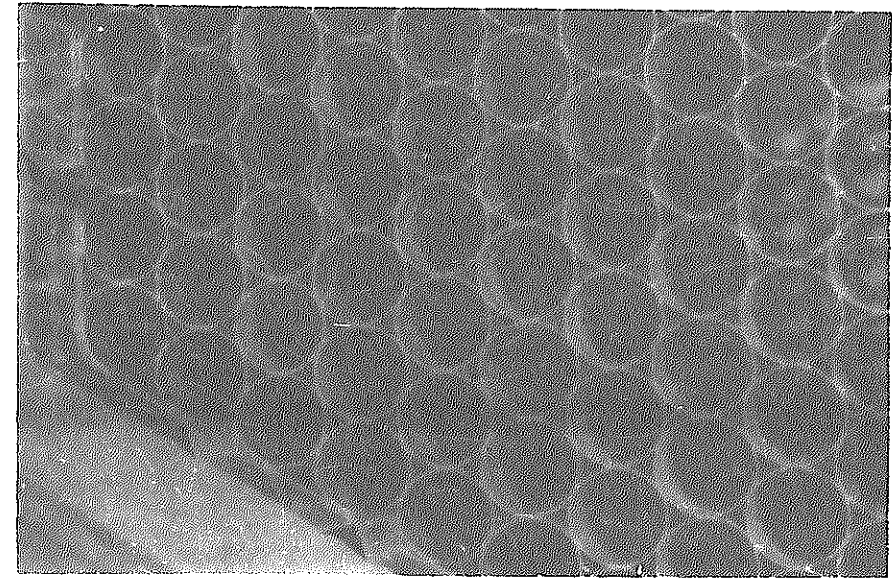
Macroscopic observation of cladding surface after galling test (MAPI ring type)
